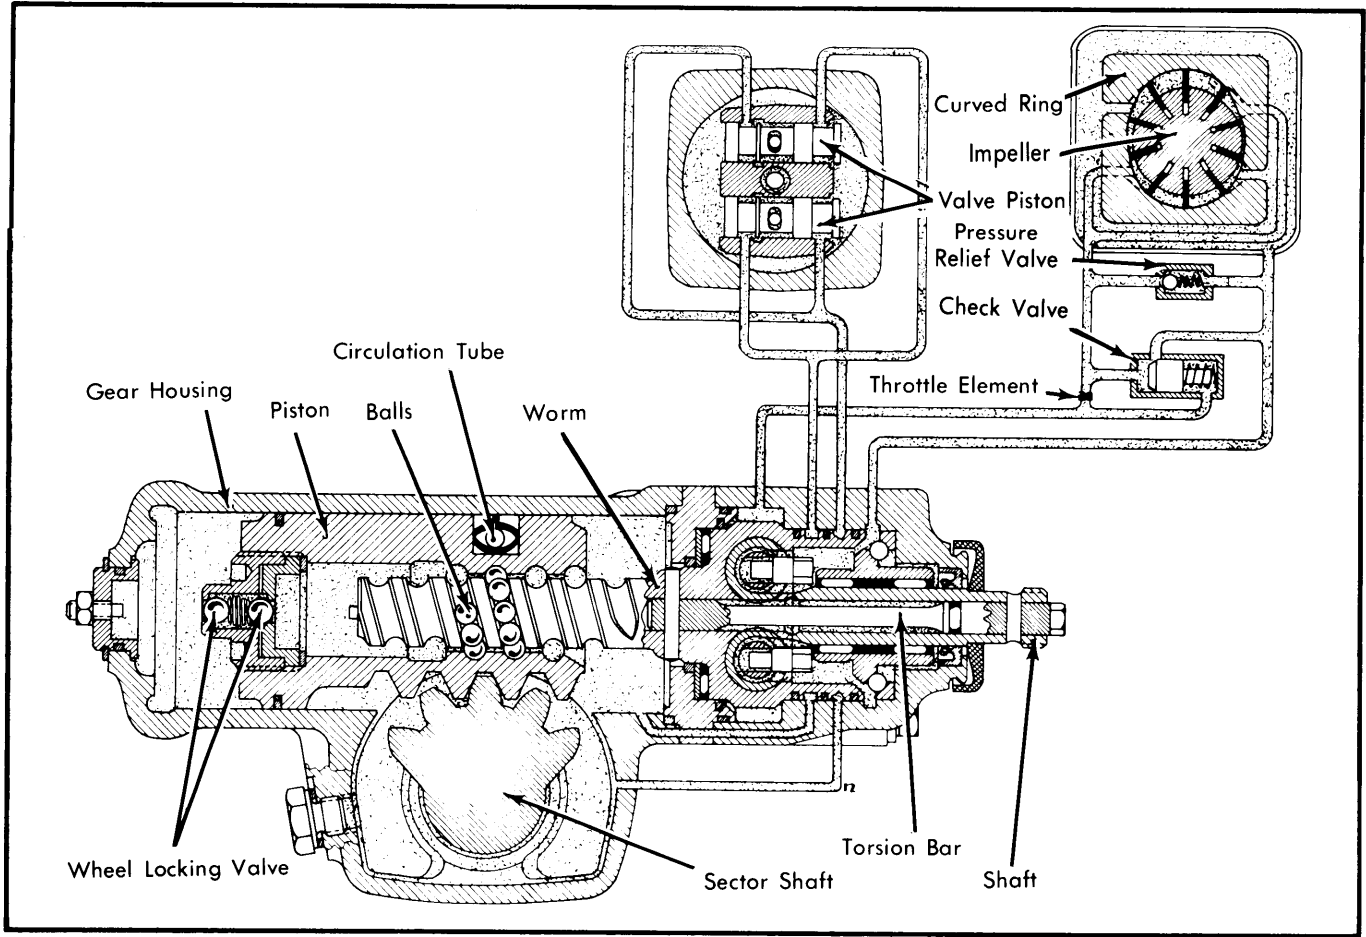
Cross-Sectional View of Power Steering Gear Assembly
